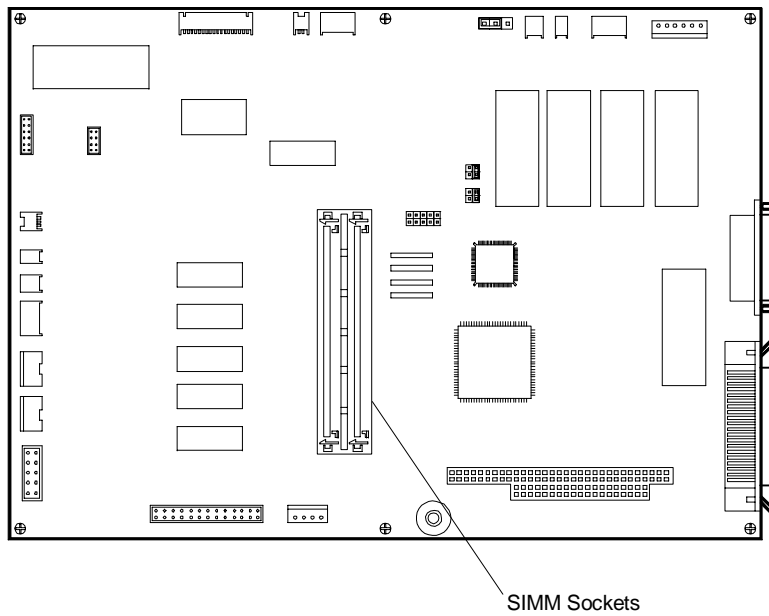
SIMM Sockets (Rev. 12, 13, or 14 Main Board)
